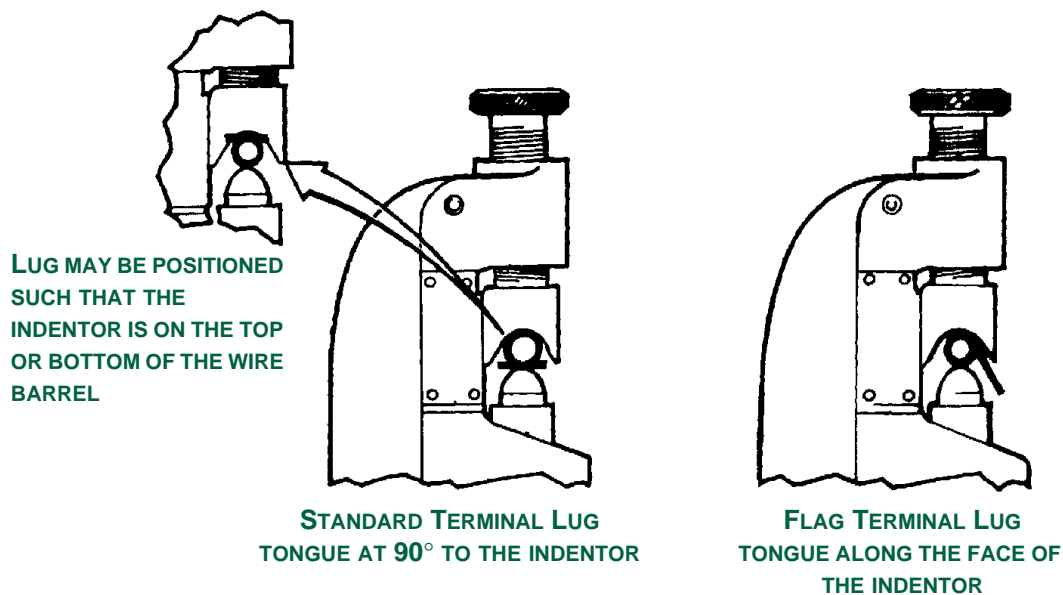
PLACEMENT OF TERMINAL LUGS IN BURNDY PRESS TYPE TOOLS
